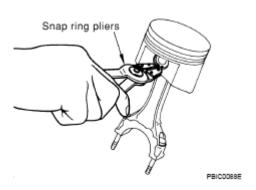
Identifying Snap Ring Into Front Of Piston Pin-Groove Courtesy of NISSAN MOTOR CO., U.S.A.
